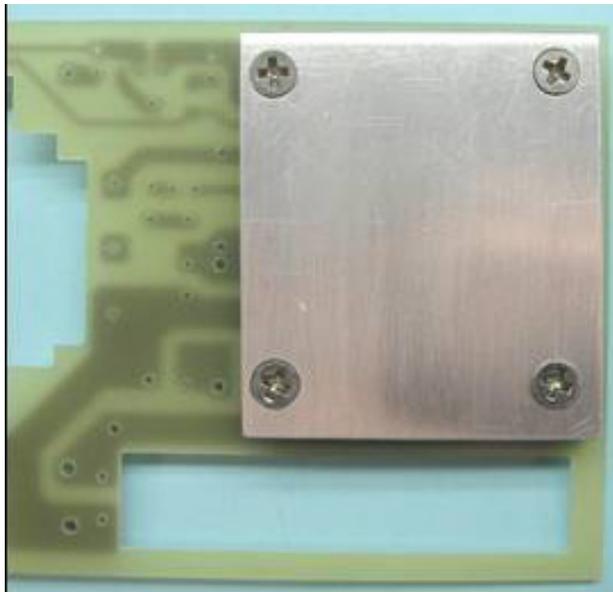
Heat Sink Assembly Drawing for TOPSwitch-JX.
